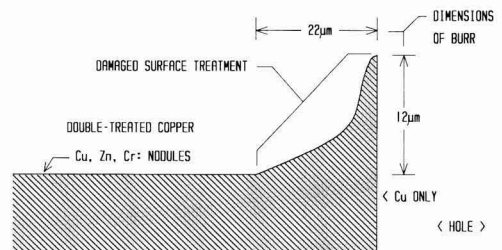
Schematic of burr illustrating typical dimensions at hole edge
